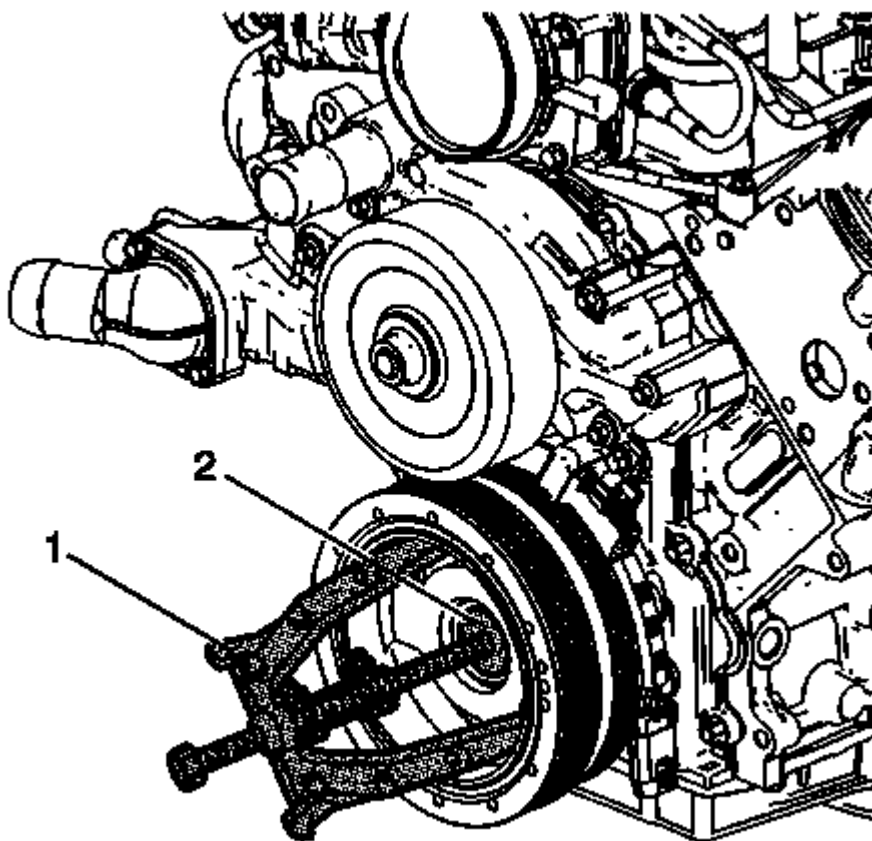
Crankshaft Balancer Remover And Protector Tools
